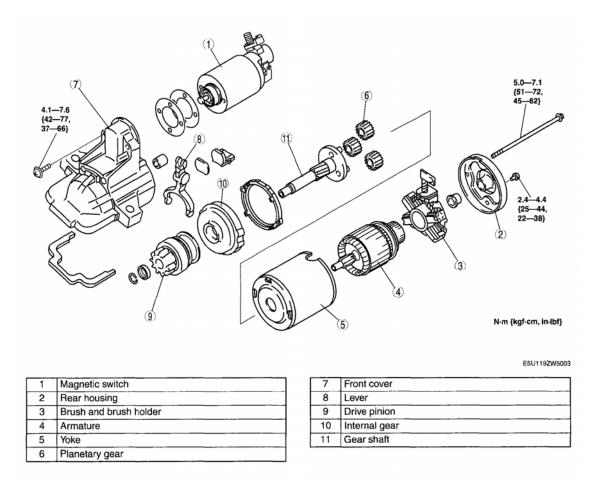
Identifying Disassemble Order Of Starter (With Torque Specifications) Courtesy of MAZDA MOTORS CORP.
